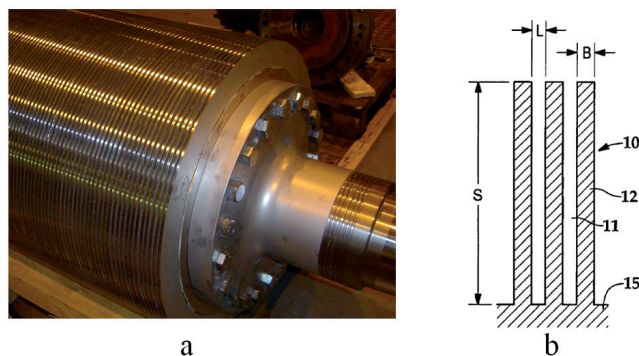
The adaptive, self-underpressurizing roll after manufacturing a) and drawing from the cross section of roll surface b) [60].
